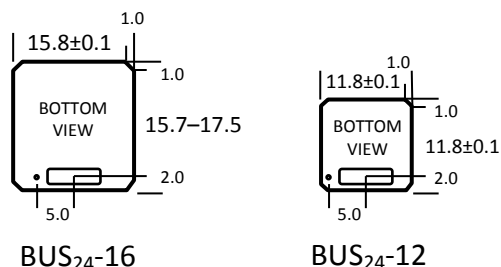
Add-on board dimensions in millimeters, two alternatives supported.
